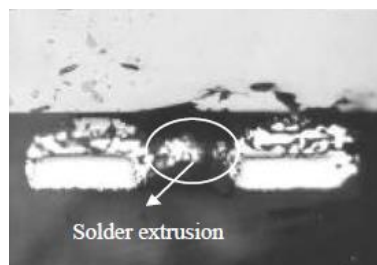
The defect of solder extrusion between solder bumps, i.e. bump-bridging, in a flip-chip packaging process [1].
